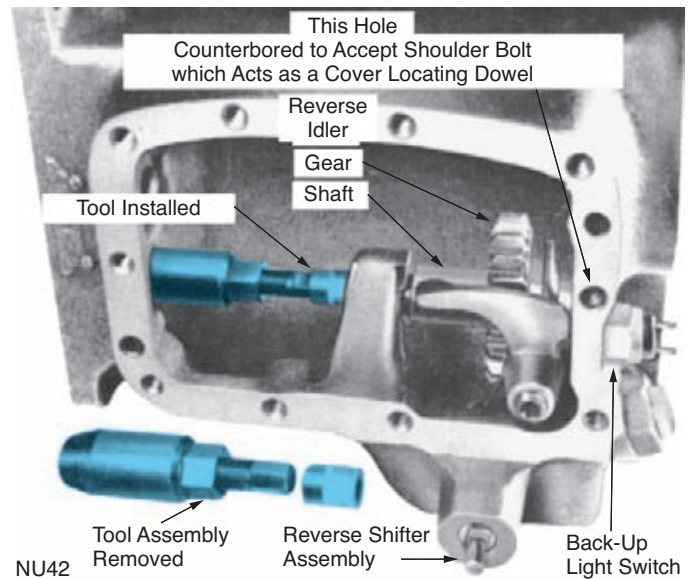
A special tool is being used to force this reverse idler gear shaft out of the case. For this purpose, a shop-made tool can be made from a nut, bolt, washer, and short piece of pipe. (Courtesy of DaimlerChrysler Corporation)
